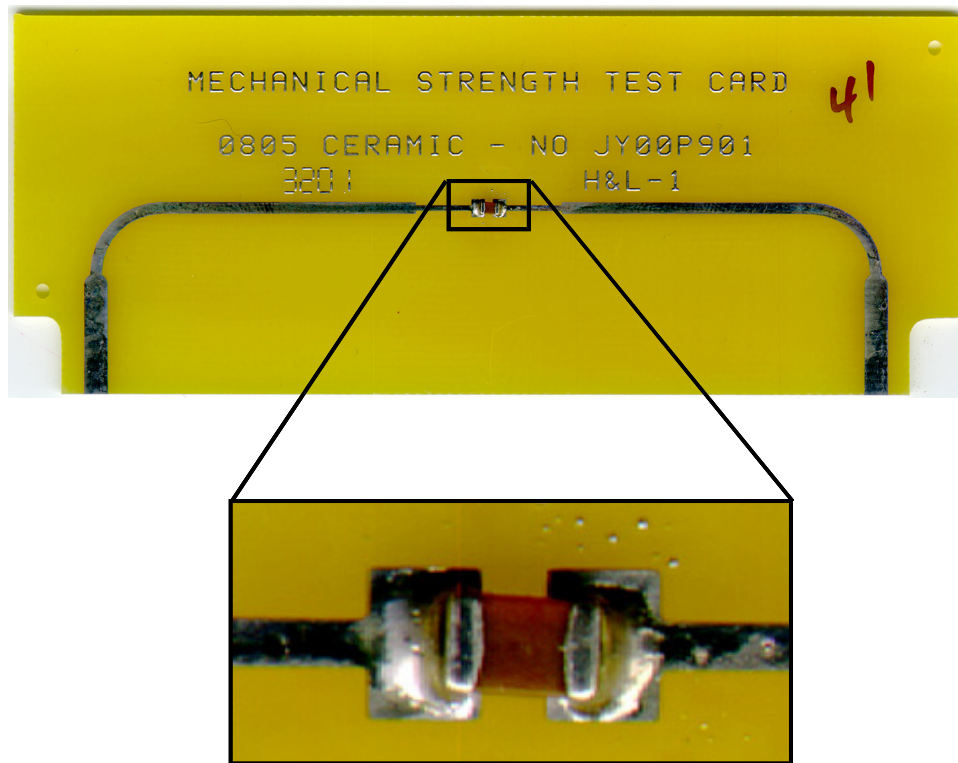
Picture of MLCC Flex-Testing Sample (0805)
